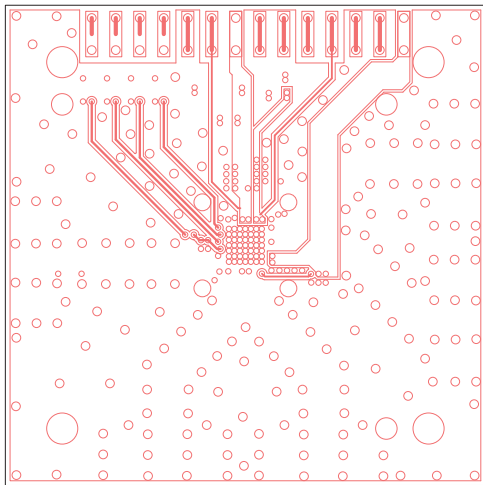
SKY65366-21 Evaluation Board Assembly Diagram
